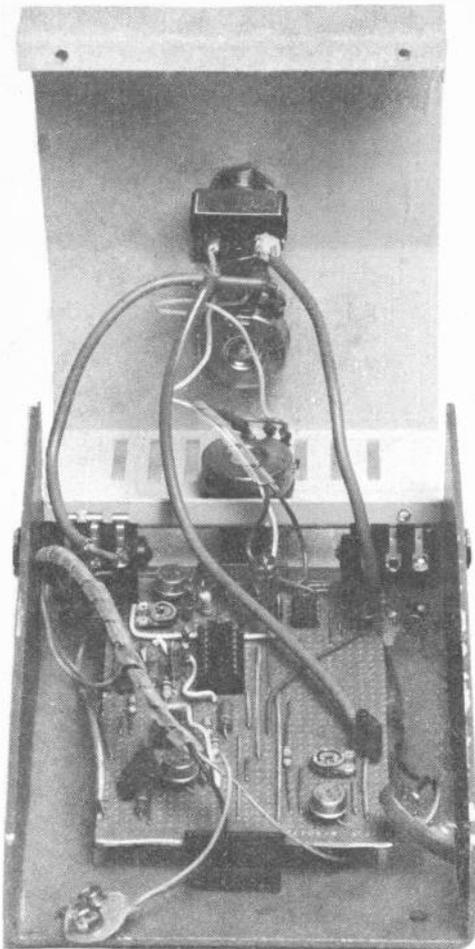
(below) show the layout of the components on the topside of the board and the breaks to be made on the underside; (top right) complete wiring between board and case mounted components; (above) prototype circuit board.
